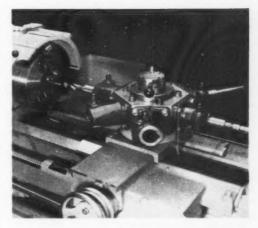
Close-up View of the Denham SR8V Centre Lathe Fitted with a 6-station, Heavy-duty Turret
